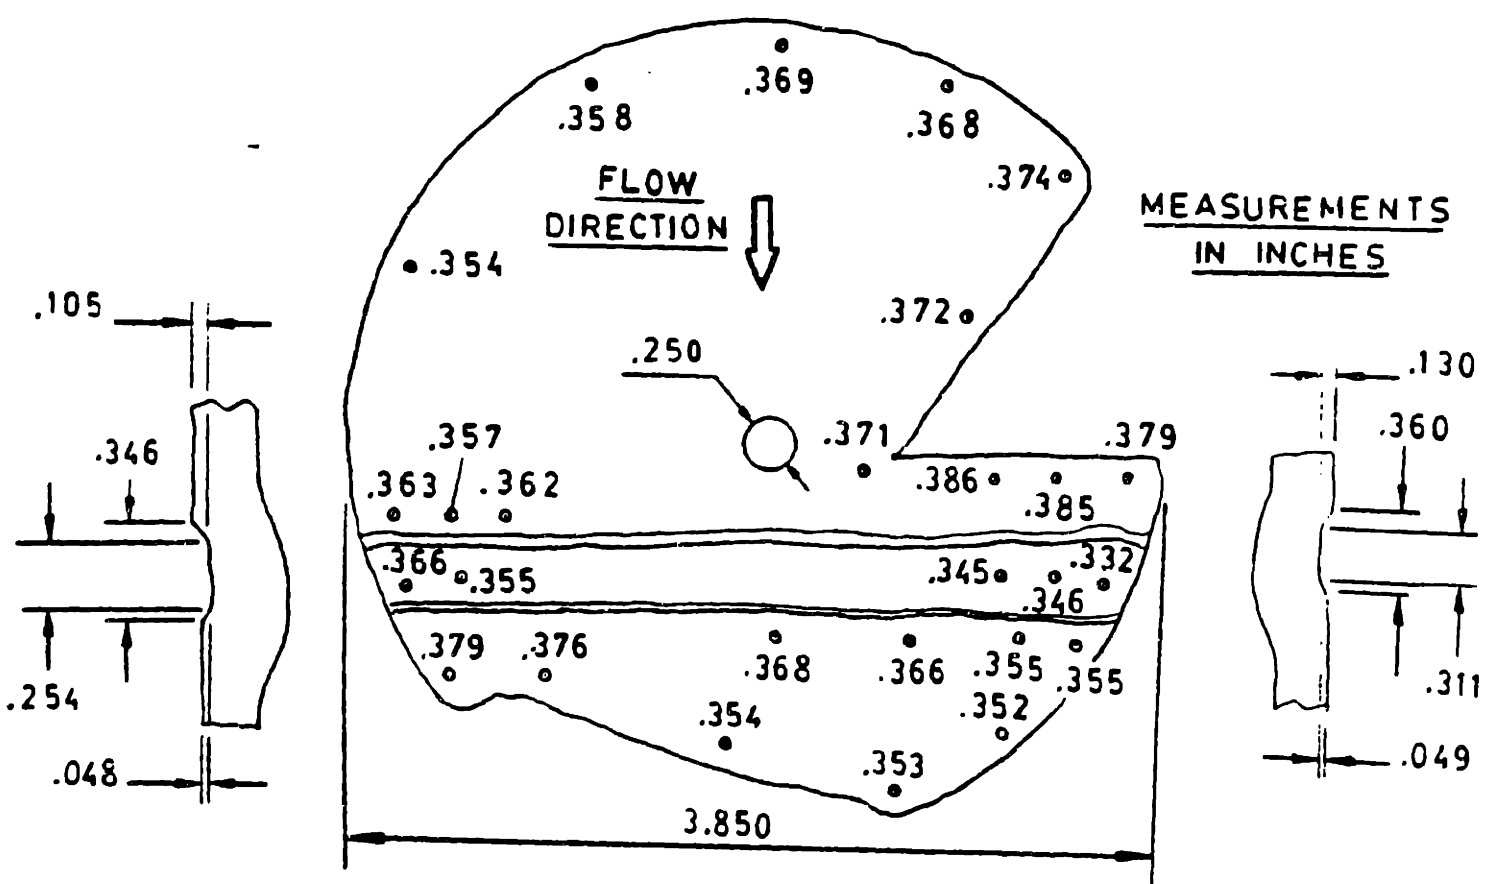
d Thickness Measurements of the Weld Joint Sample.
